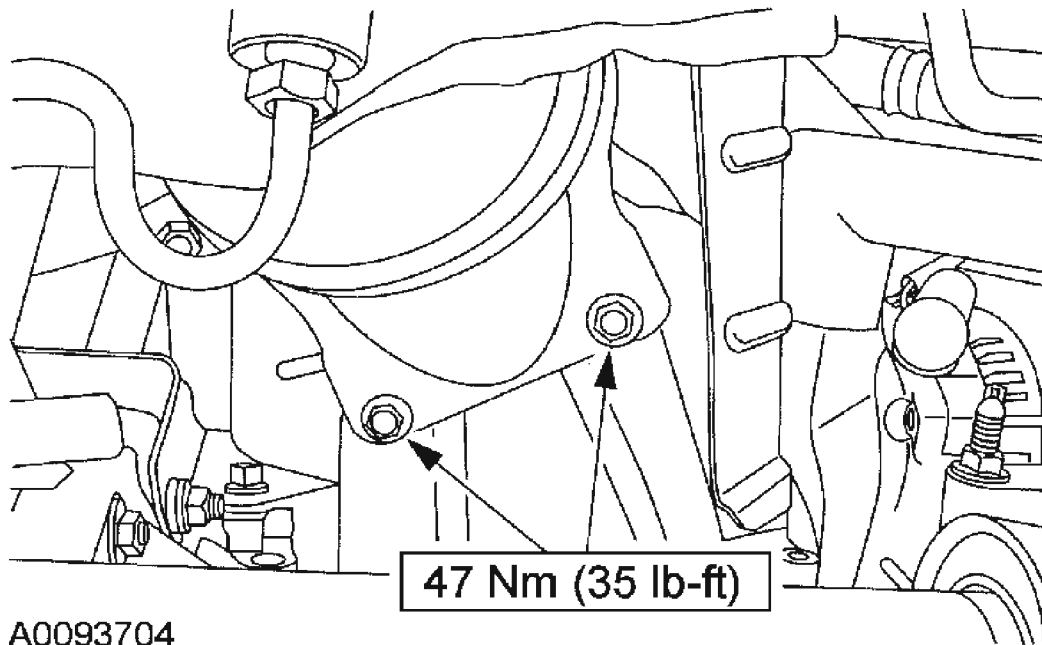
Removing Bolts And Support Bracket (1 Of 2)
